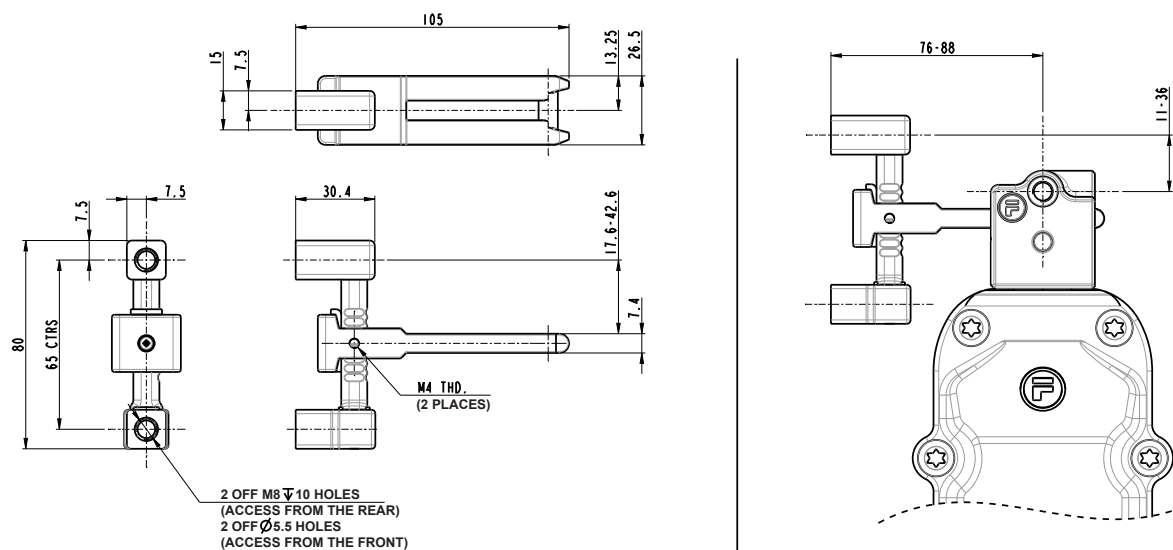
Dimensional Drawing – EXPHL1 Actuator Assembly
